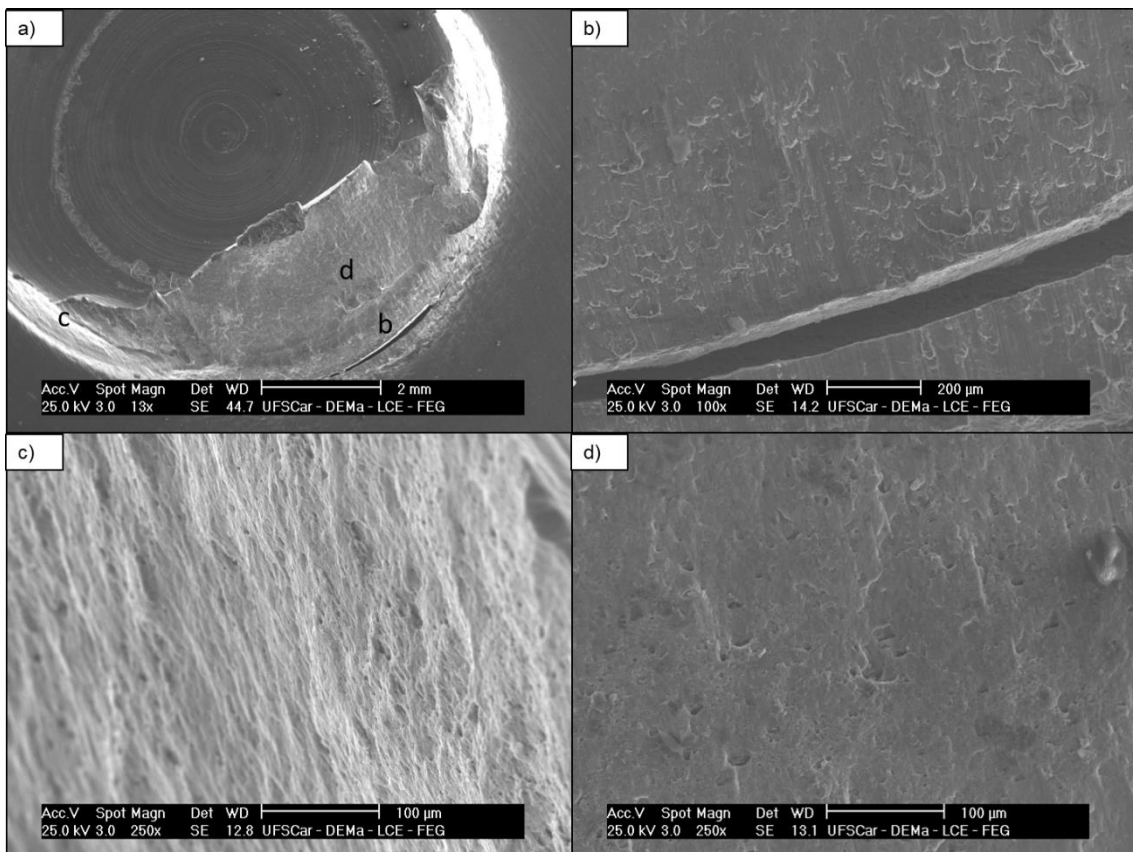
a) Fatigue fracture surface of hook pointing up specimen obtained in low-cycle load conditions b),c) and d) fracture characteristics indicating the presence of cleavage and dimples in the fractured surface.
